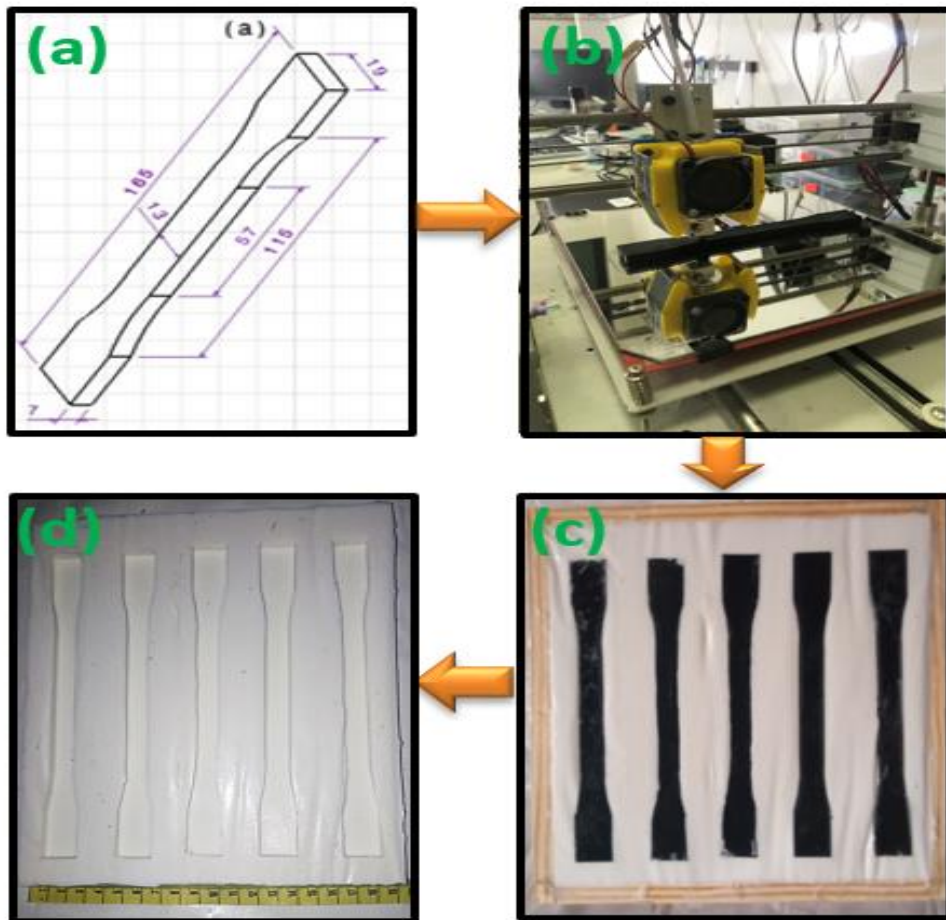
Process flow of making a silicone mold tool:(a) sampling design in CATIA,(b): printing samples in a 3DP, (c):Silicone molding and casting process and (d): silicone mold for samples
